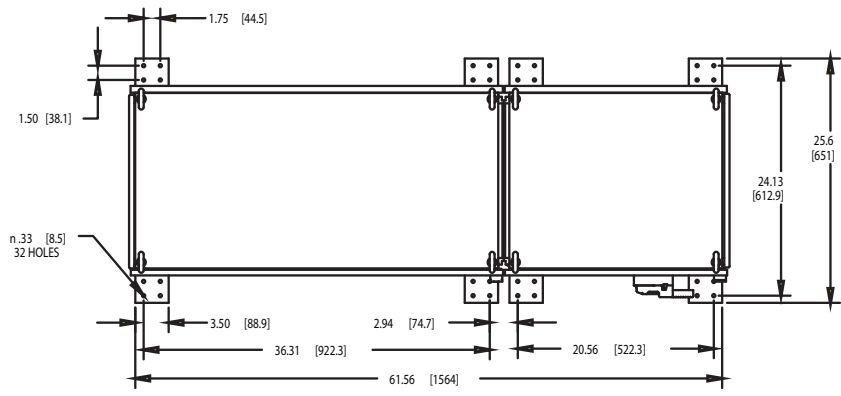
Enclosure for SMC Controllers—2000 mm x 1000 mm x 500 mm
